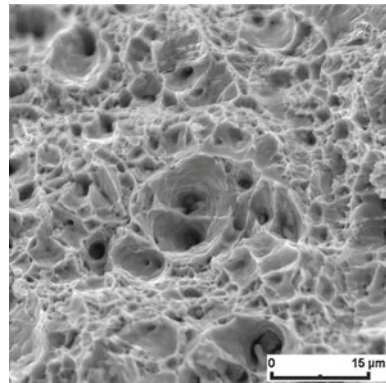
Ductile dimple fracture of the high-alloyed steel 27MnSiVS6
